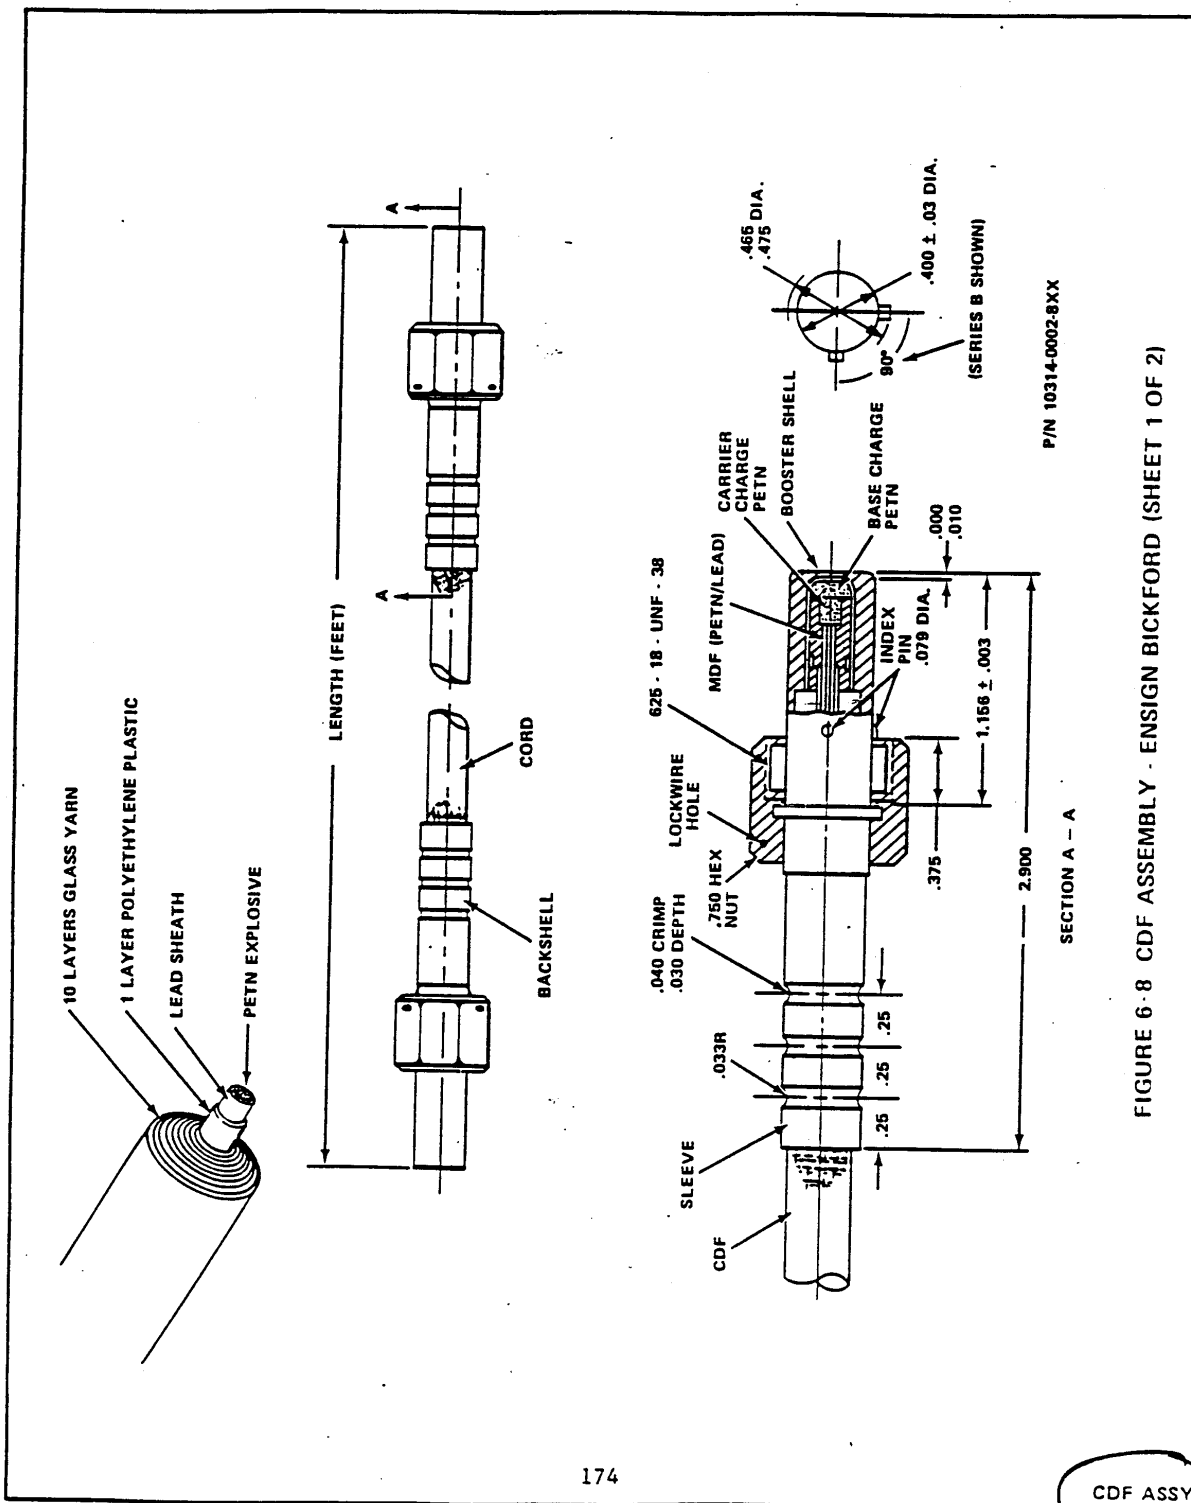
CDF ASSEMBLY - ENSIGN BICKFORD (SHEET 1 OF 2)
